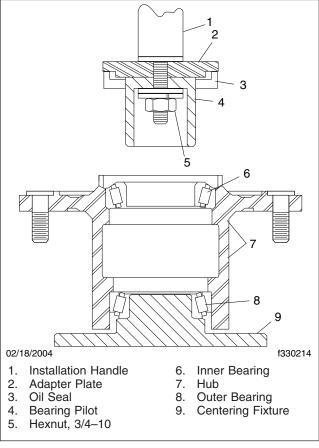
, Installing the Oil Seal Into the Hub (crosssectional view)
